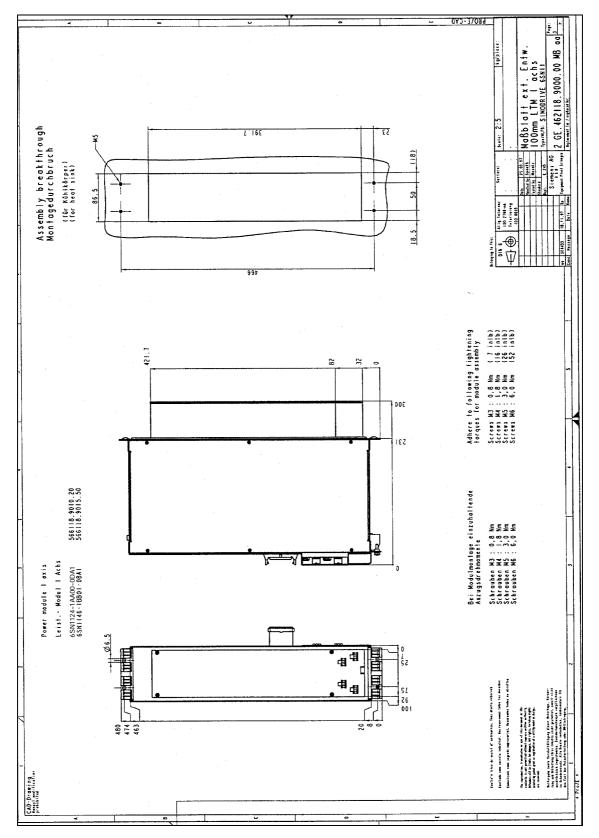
External cooling, power module 100 mm 1 axis and I/R module
